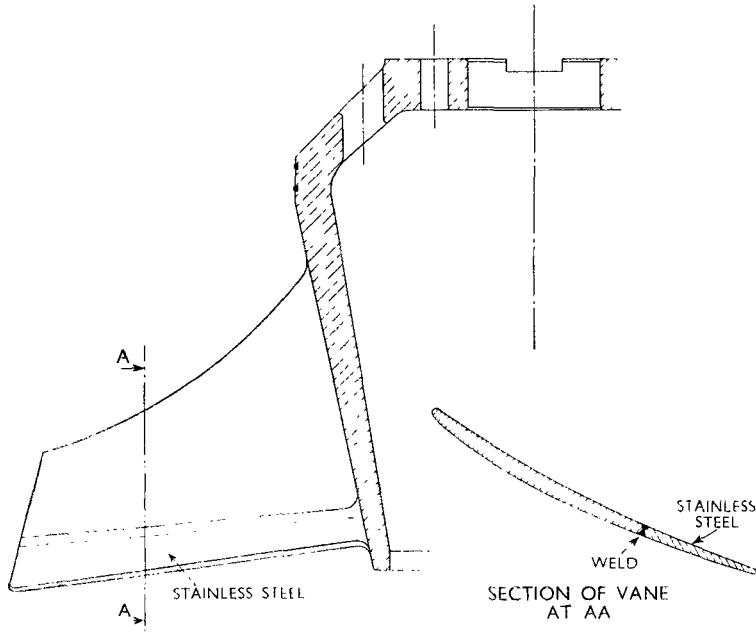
Method of Stainless Steel Protection of Propeller Wheel
